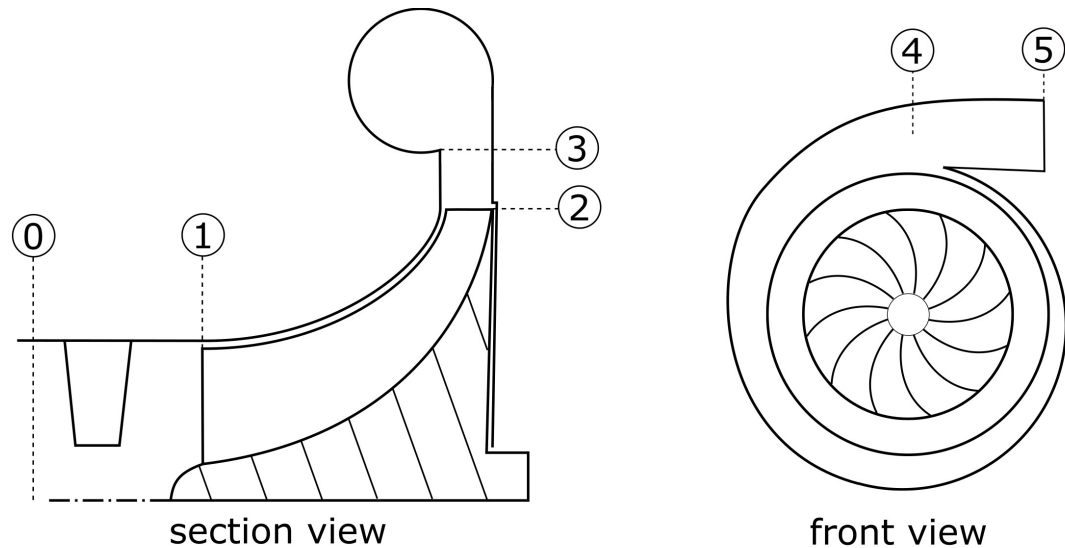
Schematic representation of a centrifugal compressor with marked sections; 0: compressor system inlet; 1: impeller leading edge; 2: impeller trailing edge; 3: end of the diffuser; 4: end of the volute; 5: compressor system outlet
